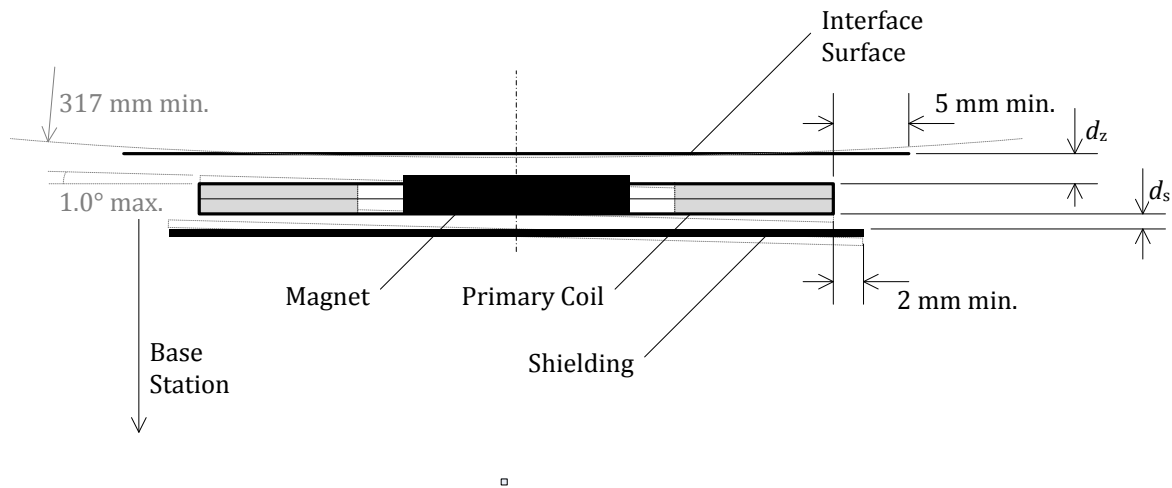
Primary Coil assembly of Power Transmitter design A5
